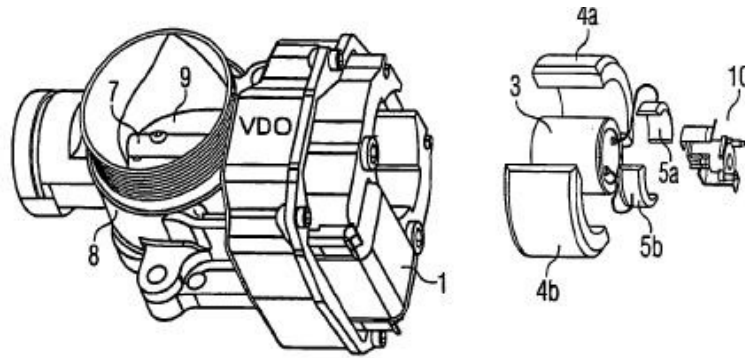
BORNMANN GERD [DE]; SAUERSCHELL WOLFGANG [DE]; SCHOLTEN LUTZ [DE]; WIESE PETER [DE] (2002)'s direct electromagnetic drive for a throttle valve shaft in a throttle valve connector (US Patent No. 7,100,568).
